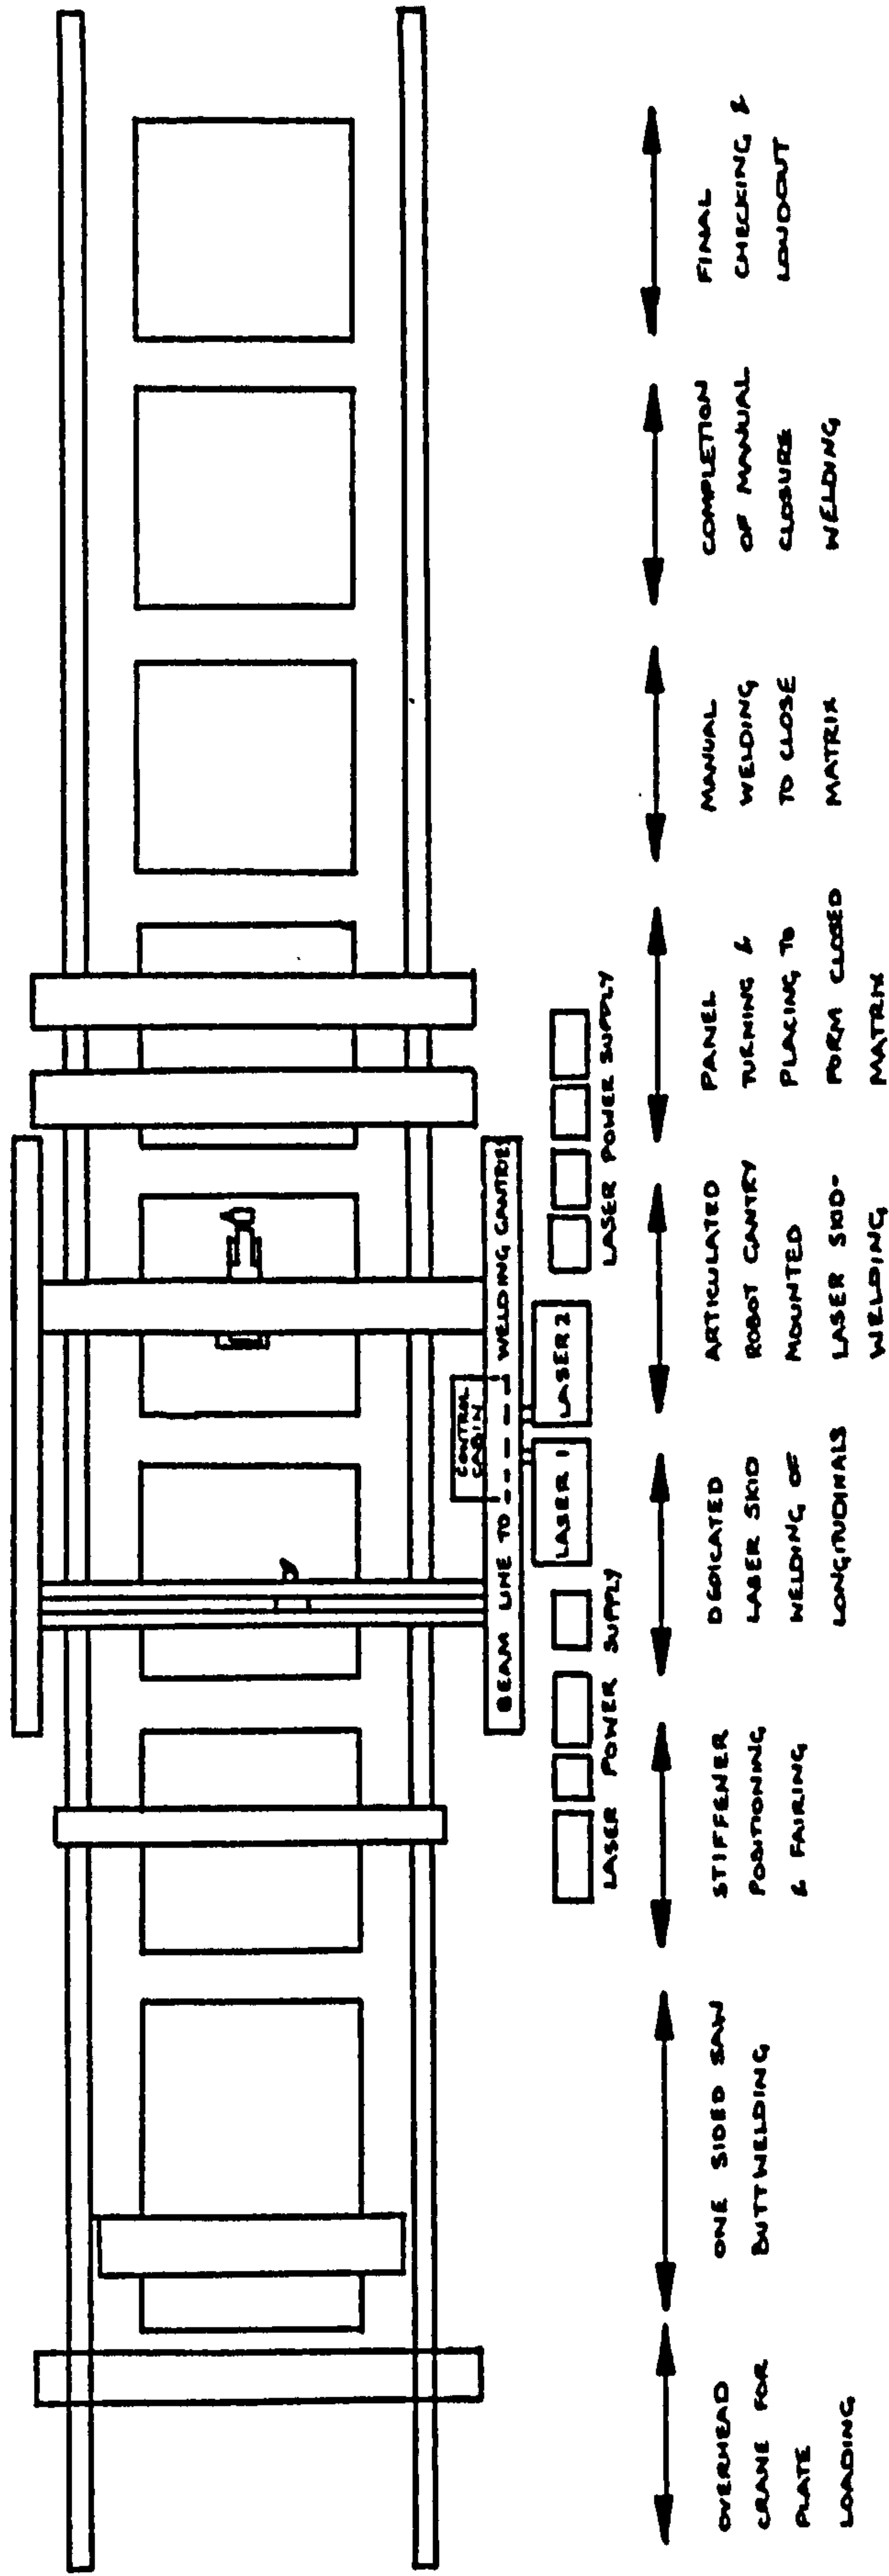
Proposed flow line for a matrix panel line incorporating laser skid welding
